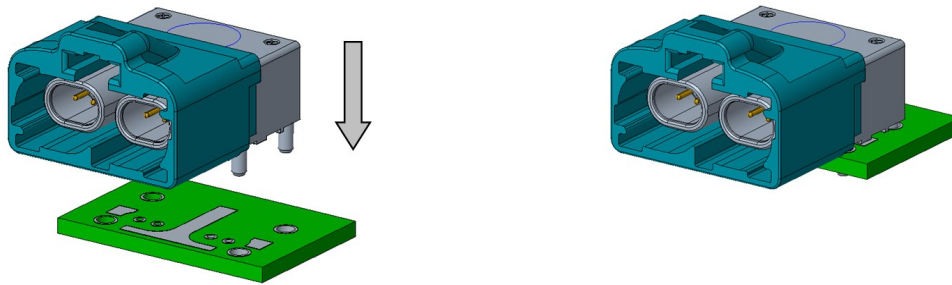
/ Pin Header 2P 90° unsealed, TE-No. 2974902
